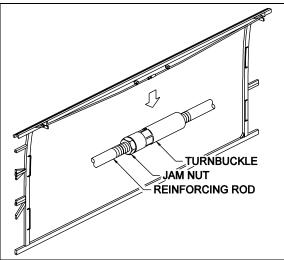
FRONT SLIDE-OUT ROOF REINFORCING
